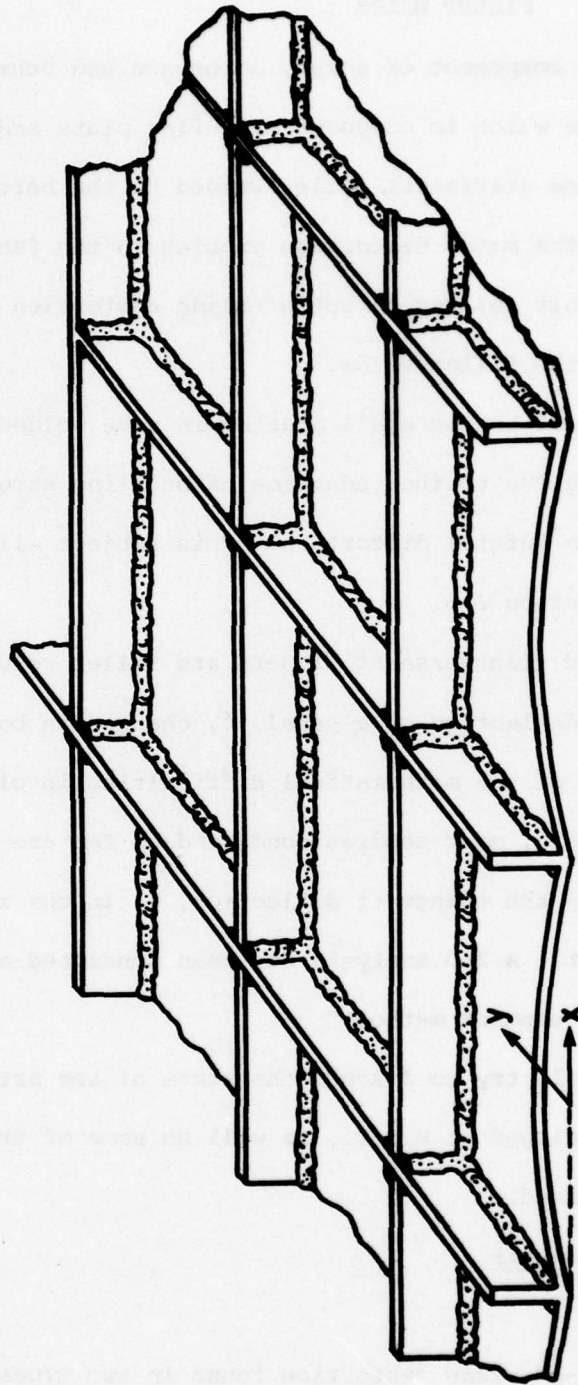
Panel Structure with Longitudinal and Transverse Stiffeners
